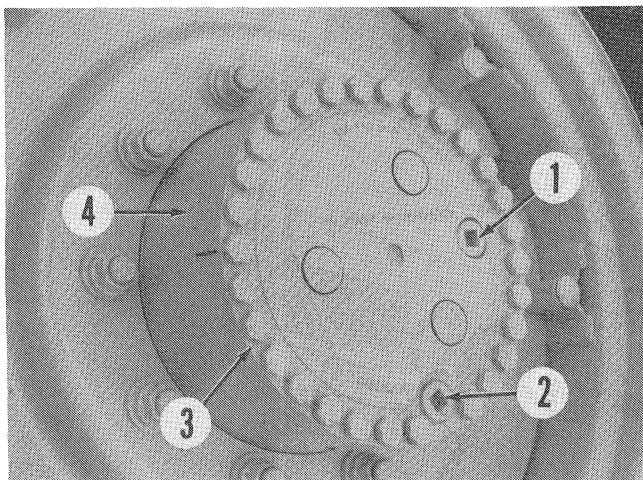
Prior to removing planetary unit, scribe a line on planetary cover (3) and hub (4) for alignment when reassembling.
